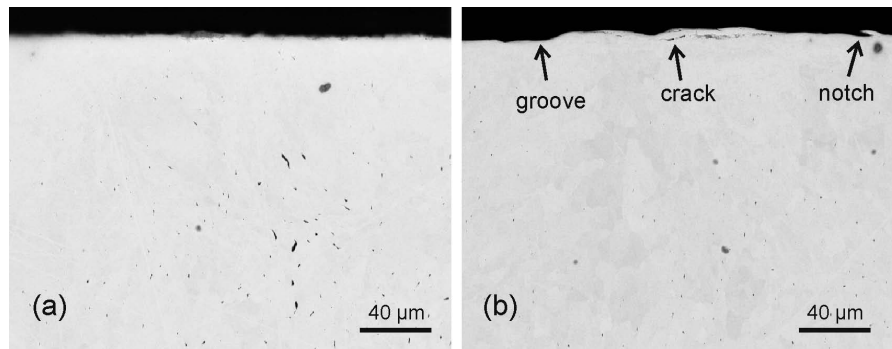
BSE micrographs of the cross sections of flat surfaces machined by peripheral milling (radial) showing (a) no defects and (b) shallow grooves as well as tiny cracks parallel to the machined surface.
